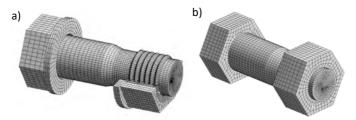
FEM model of bolt: a) Bolt with thread; b) Bolt without thread
